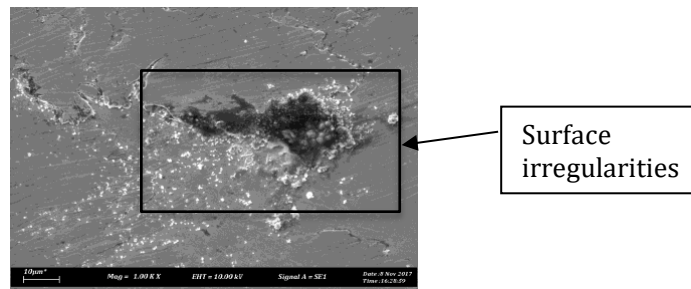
Surface irregularity on the workpiece surface observed at standard run 16 (125 m/min, 0.4 mm/tooth, 0.3 mm).
